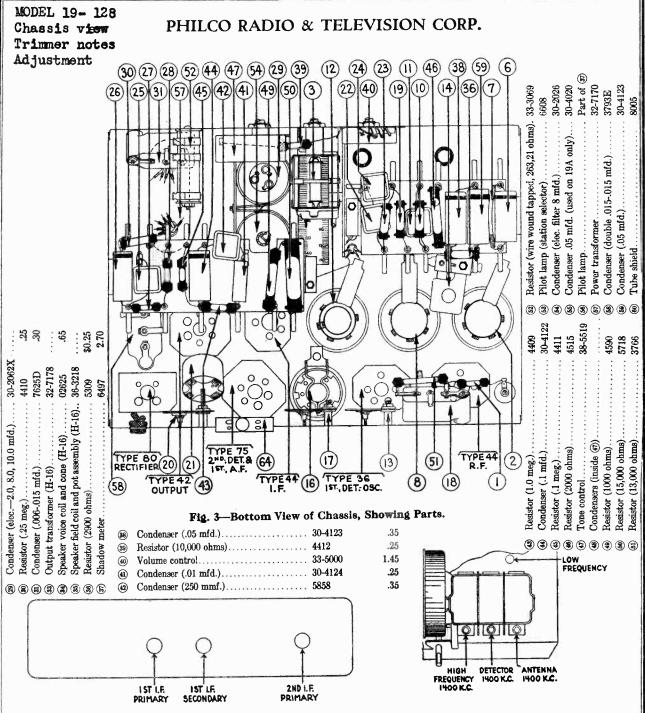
Rear of Model 19 Chassis, showing location of Compensating Condensers
